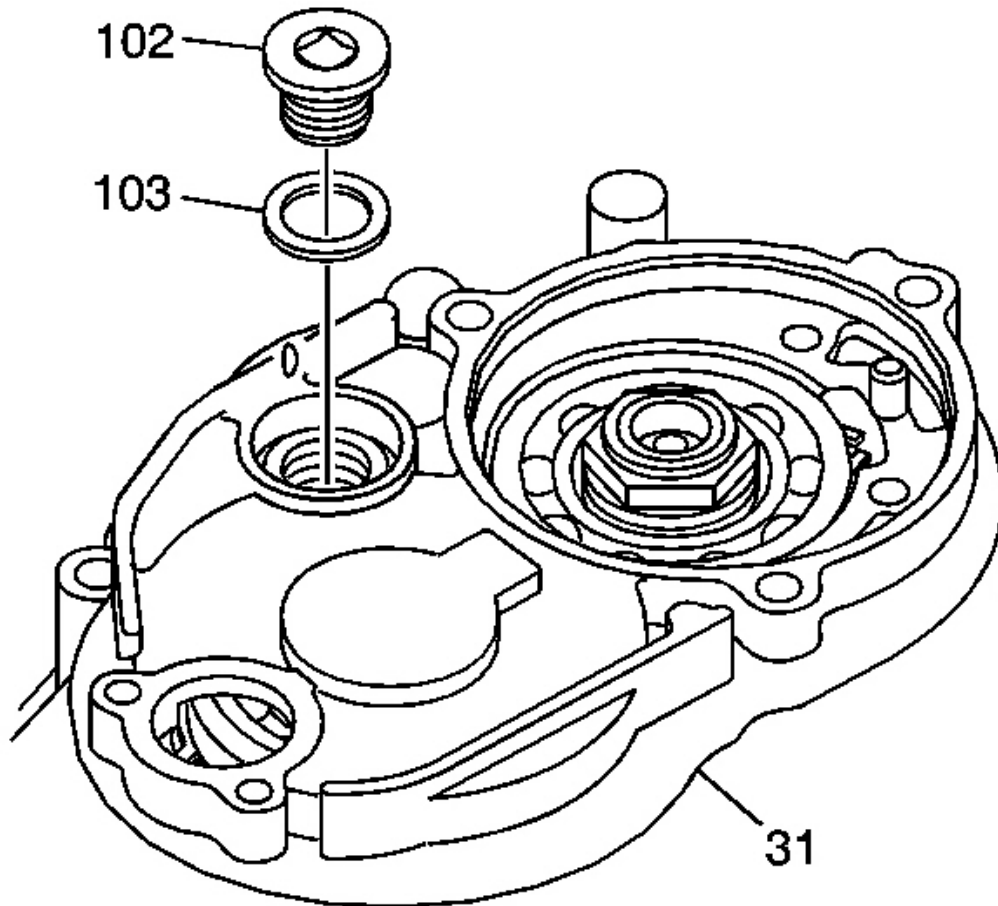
Reverse Idler Gear Access Hole Plug, Seal & Transmission Case
